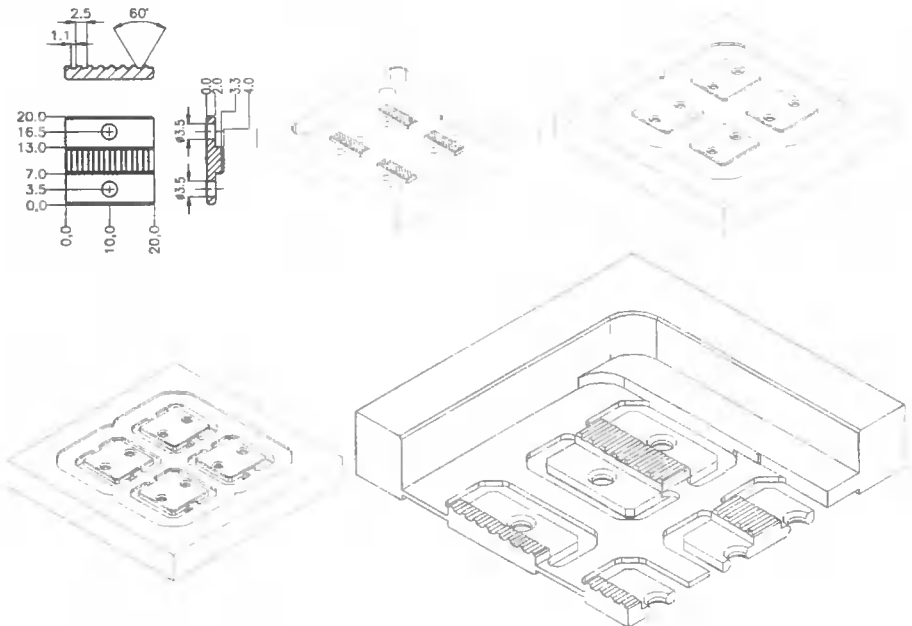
Stages of the technological process: part drawing; the state after the first machining with a pocket compensating for the workpiece thickness; after machining the reverse side; cutting the elements off
